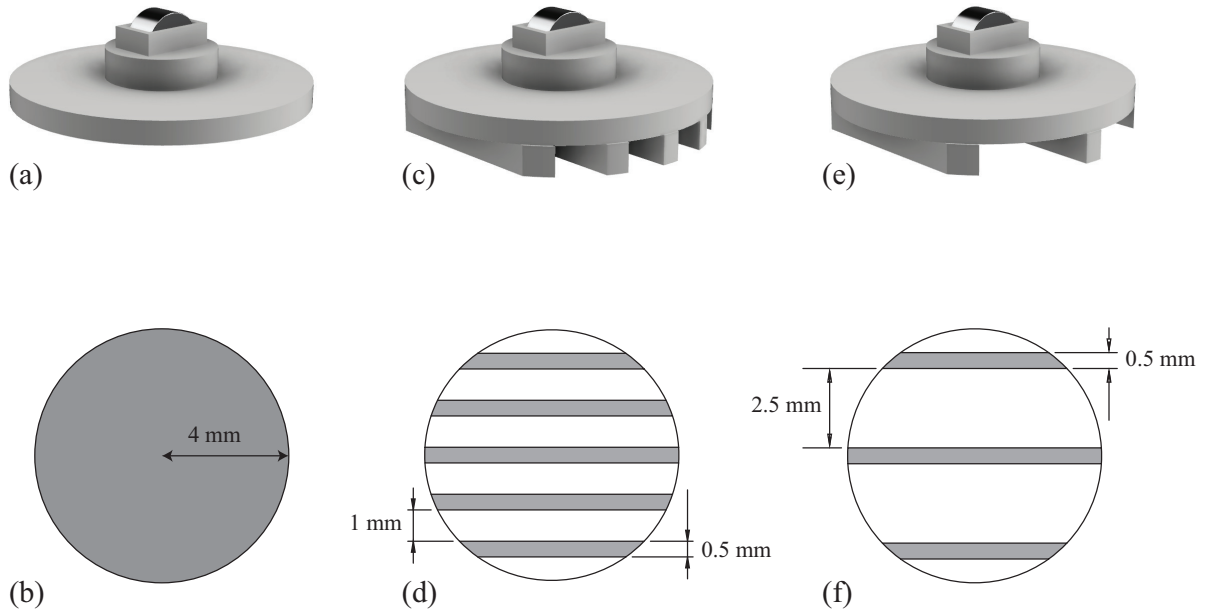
Circular sliders without and with grooved bottoms. (a) 3D drawing of the slider without grooved bottom and (b) plan view of the bottom surface. (c) 3D view of a slider with five ridges and (d) plan view of the bottom surface. (e) 3D view of a slider with three ridges and (f) plan view of the bottom surface. (b, d, f) The area in contact with water is in grey. The sliders radius is  $4.00 \pm 0.05$  mm.
